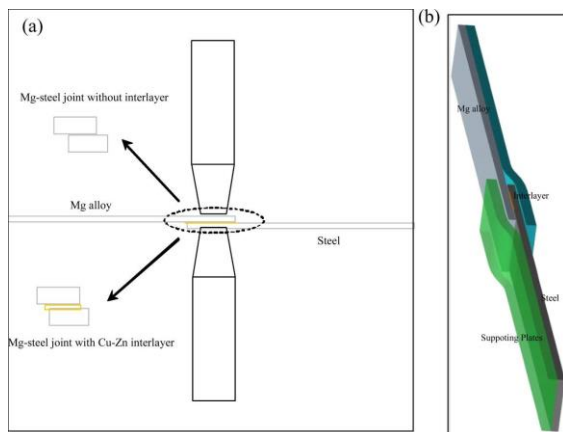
(a) Sketch of experimental setup and (b) shear test specimen.
